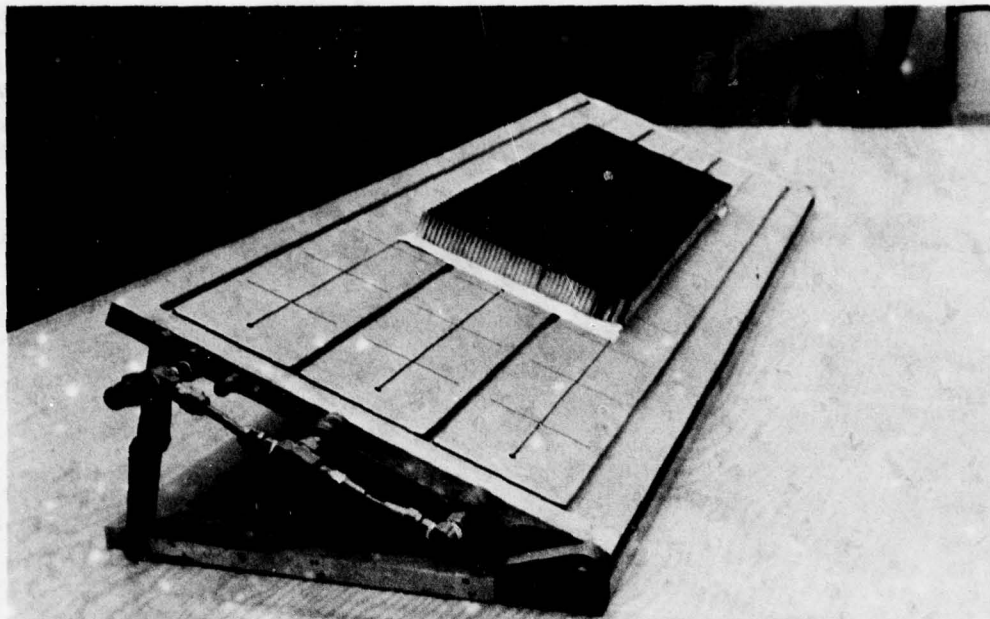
Sine Plate for Making Angle Cuts on Honeycomb Core
